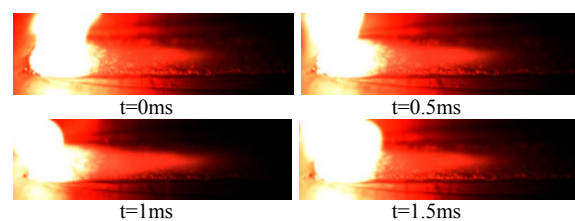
The typical images of the keyhole for different welding speeds during laser welding of TC4
